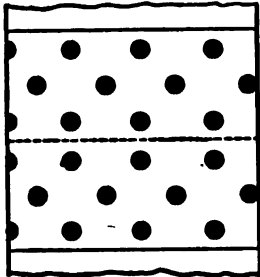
Treble-riveted butt-joint zigzag riveted.
